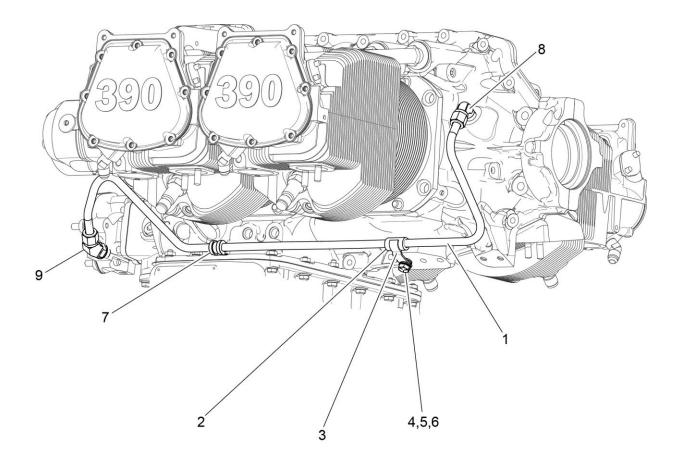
Propeller Governor Oil Line Tube Assembly and Attaching Parts
